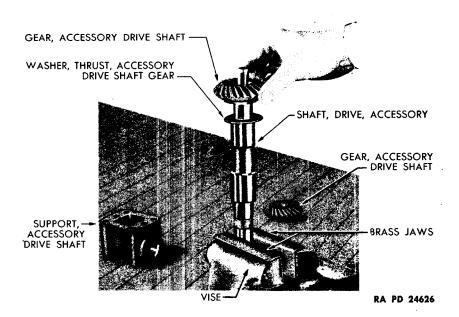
Installing Accessory Drive Shaft Gear On Shaft
